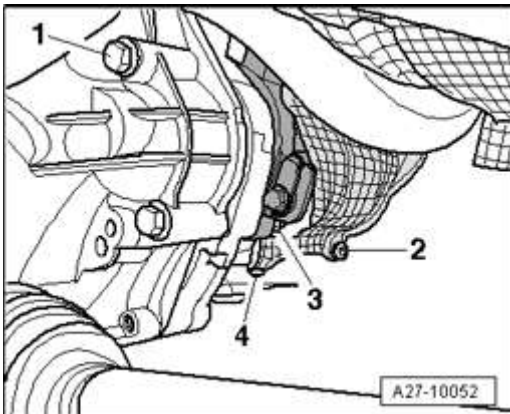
Identifying Screws, Nuts, And Starter Heat Shield
